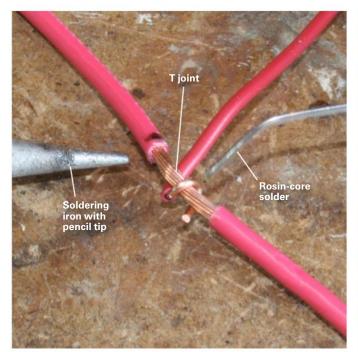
Solid connection. Pete made a T joint between the solid feeder wire and the stranded bus wire. He used a soldering iron with a pencil tip to melt the rosin-core solder.
